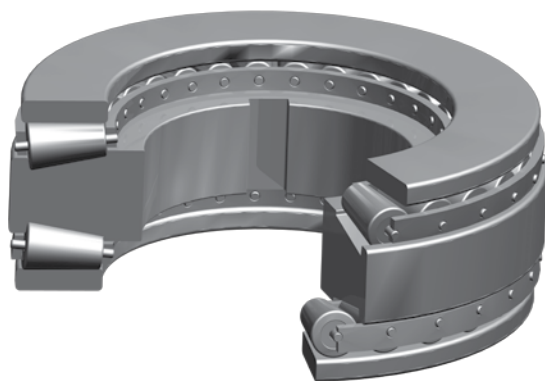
Type TTDWK double-row thrust tapered roller bearing.
